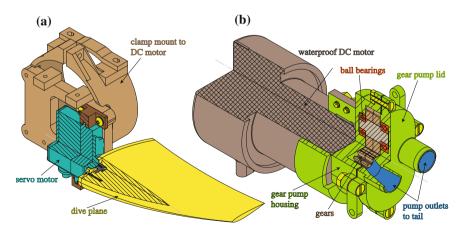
a Dive plane attached to waterproof servo and clamp mount, and b gear pump with dc motor
